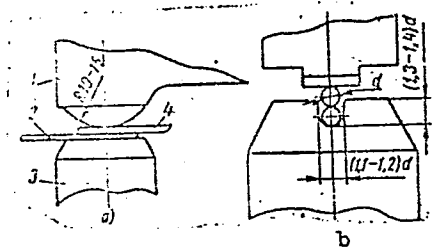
Welding head geometry for wire-to-plate (a) and wire-to-wire (b) welds: 1- instrument, 2- plate, 3- reflector, 4- wire
